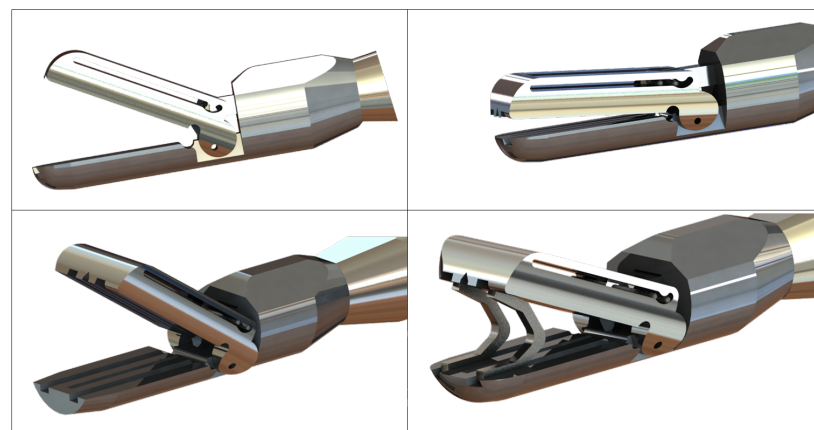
Final design of the tip. Top left, side view of opened jaws. Top right, side view of almost closed jaws. Bottom left, isometric view of opened jaws. Bottom right, isometric view of opened jaws with surgical clips.
